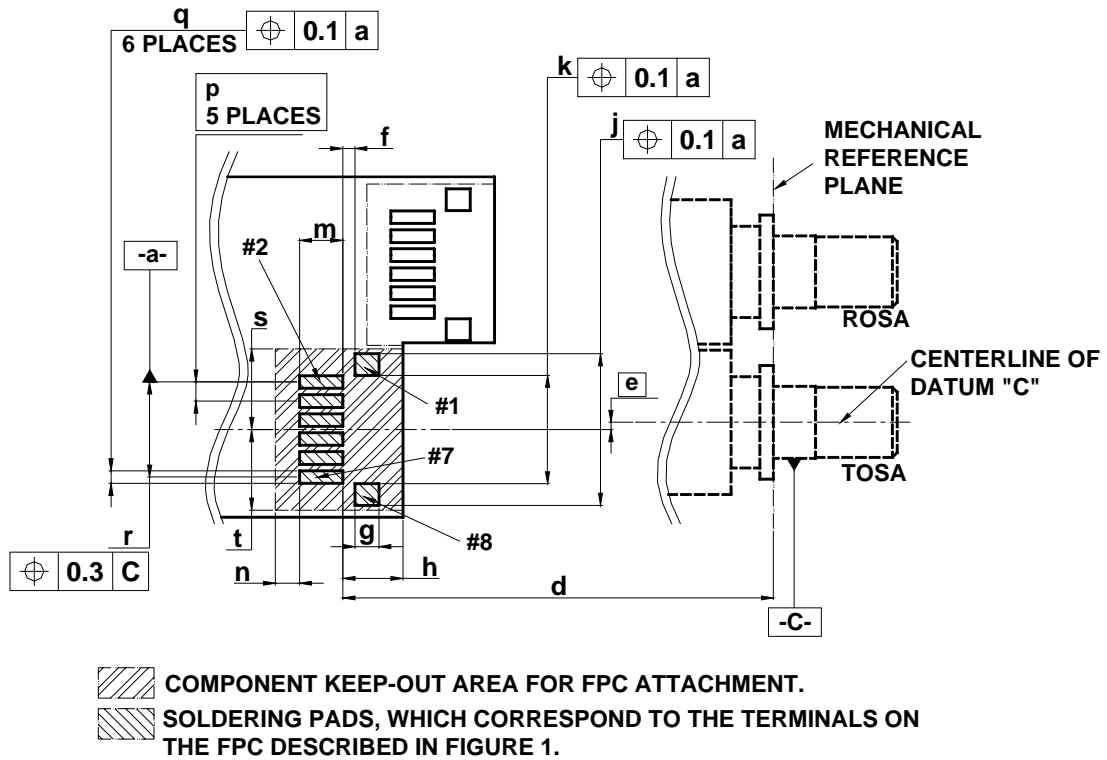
Recommended pattern layout for the PCB in a XFP transceiver
